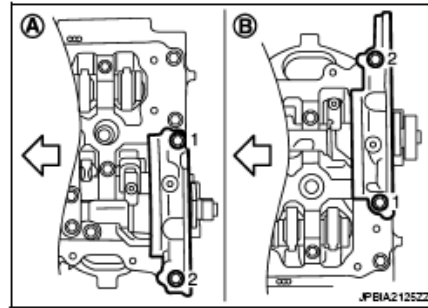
Identifying Actuator Bracket Mounting Bolt Loosening Sequence
